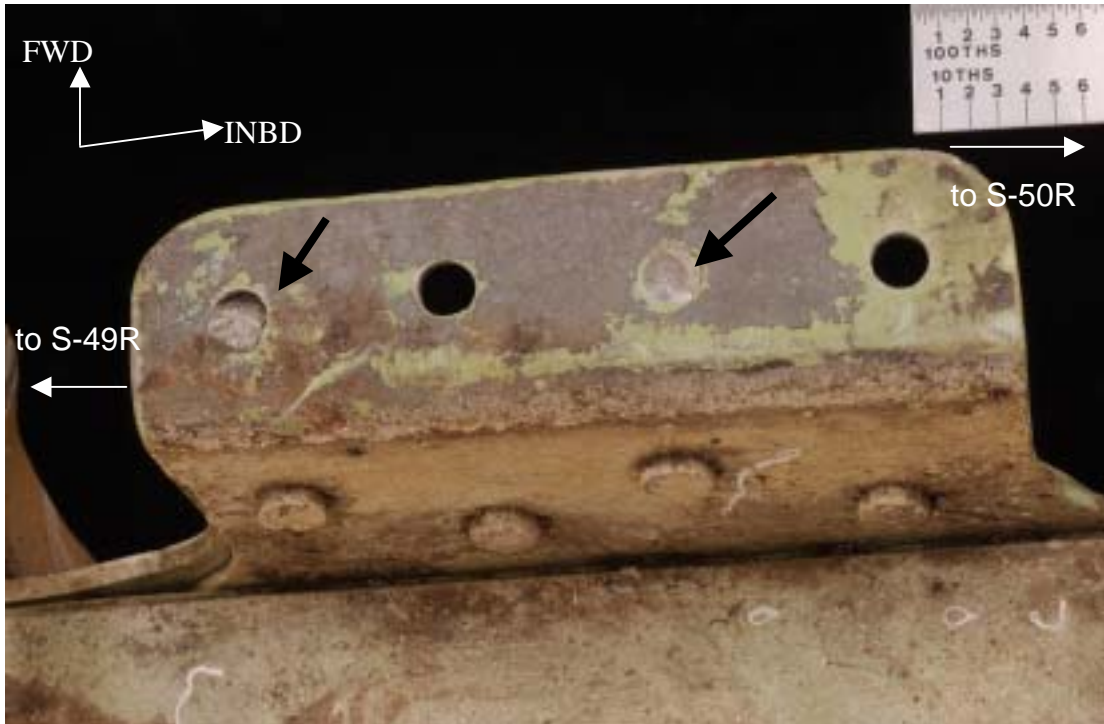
Skin flange rivet fractures at shear tie between S-49R and S-50R of the STA 2040 frame segment. Black arrows indicate the direction of loading.
